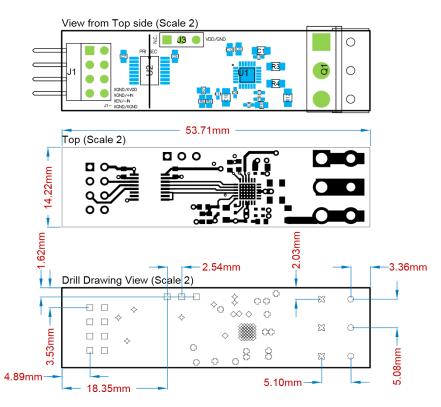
NCP51705 SiC EVB PCB Hole Pattern
